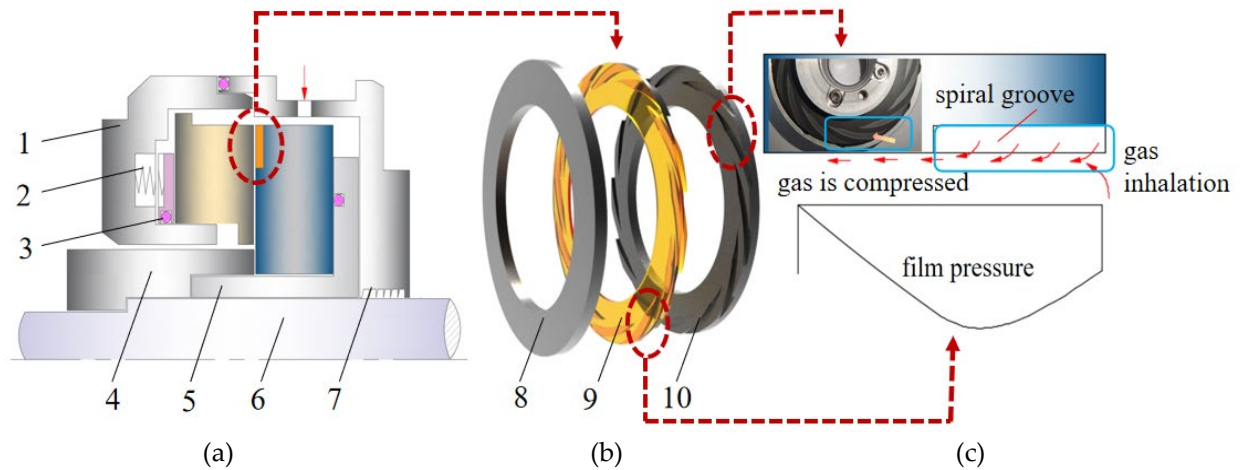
Rotary mechanical shaft end seal forms [7-10].
